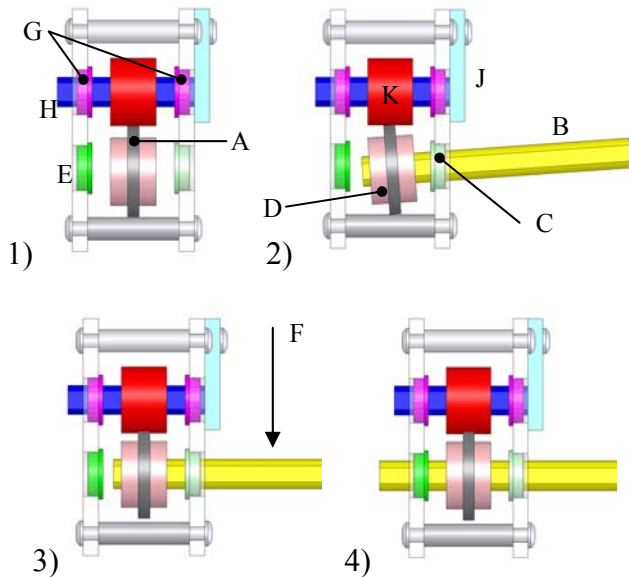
Schematic representation of pre-deployment assembly process of the wheel-leg axles into the drive system.
